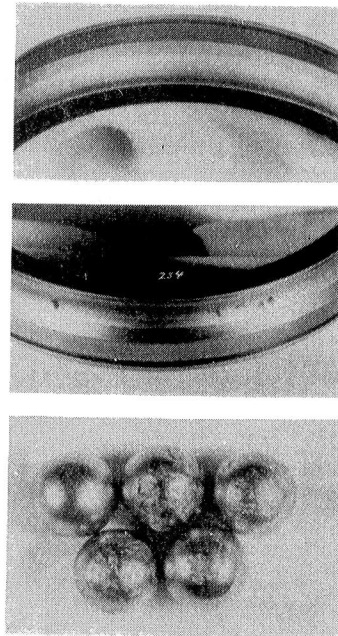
Typical Examples of Surface Distress in Ball Bearing Components
